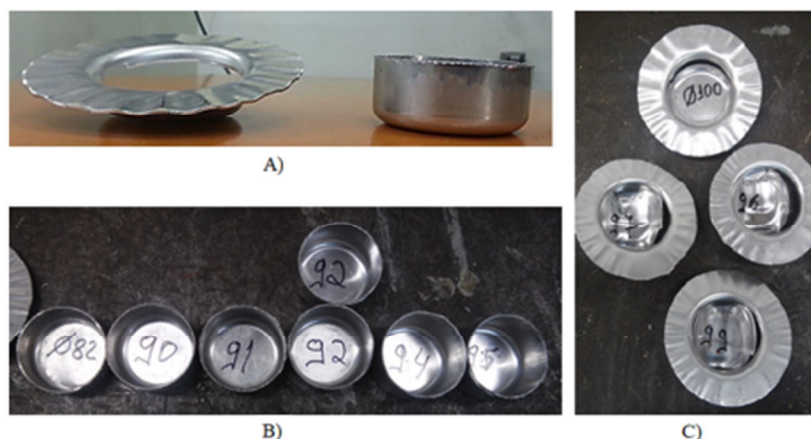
A) Specimens after the test; B) Test specimens after the test (without rupture); C) Test specimens after the test (with rupture)
